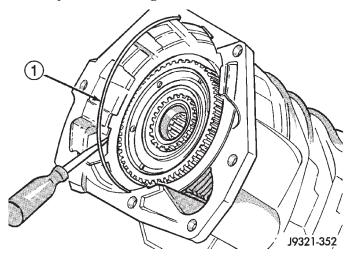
Removing Overdrive Clutch Pack Retaining Ring 1 - OVERDRIVE CLUTCH PACK RETAINING RING
